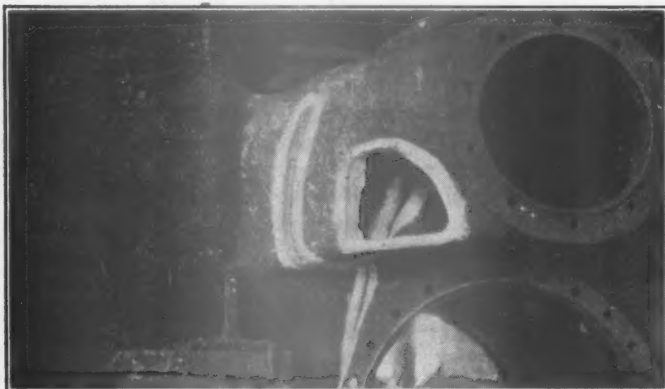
Cylinder with Cracked Internal and External Port Walls Ready for Welding with Bronze
